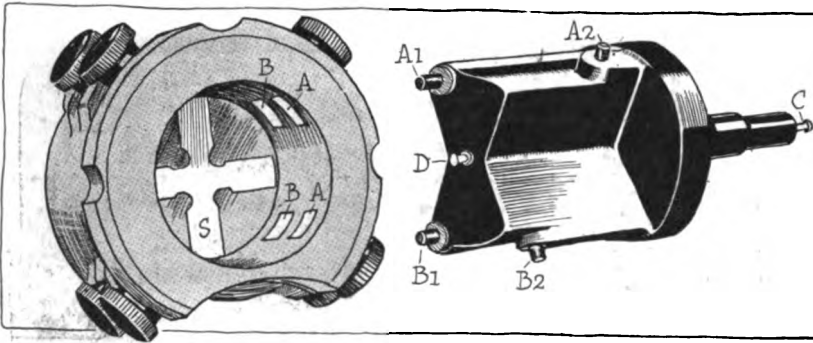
Compound distributor box and block on the eight-cylinder Dixie magneto. The distributor on the twelve is the same except that the contact piece S which transfers the high tension current to the terminal plates through the brushes in the block is six-pointed to supply the twelve terminals
